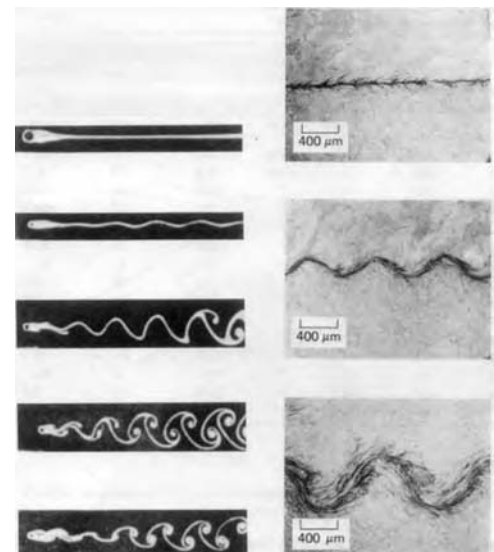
Explosion welding interface exhibits patterns similar to flowing fluid, even though metals remain as solids. Right side shows explosion welding interface patterns; left side shows pattern of fluid flow around a pin. Velocity increases from top to bottom in both cases.
